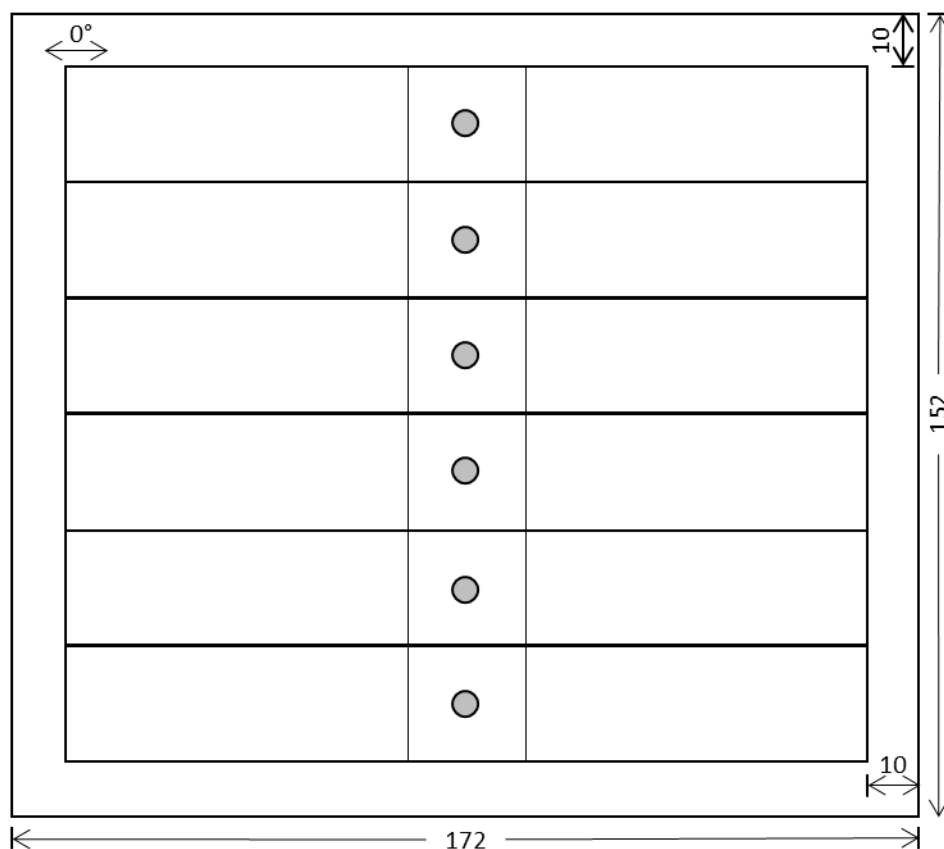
Positioning of the coupons on the test panels for filled hole compression test. All dimensions are expressed in mm.
